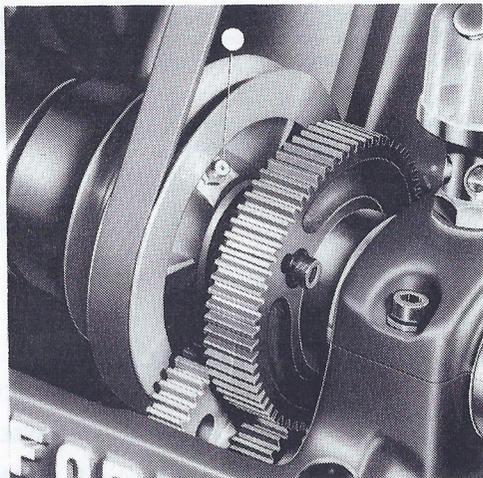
Showing the oil nipple for headstock pulley bearing lubrication
